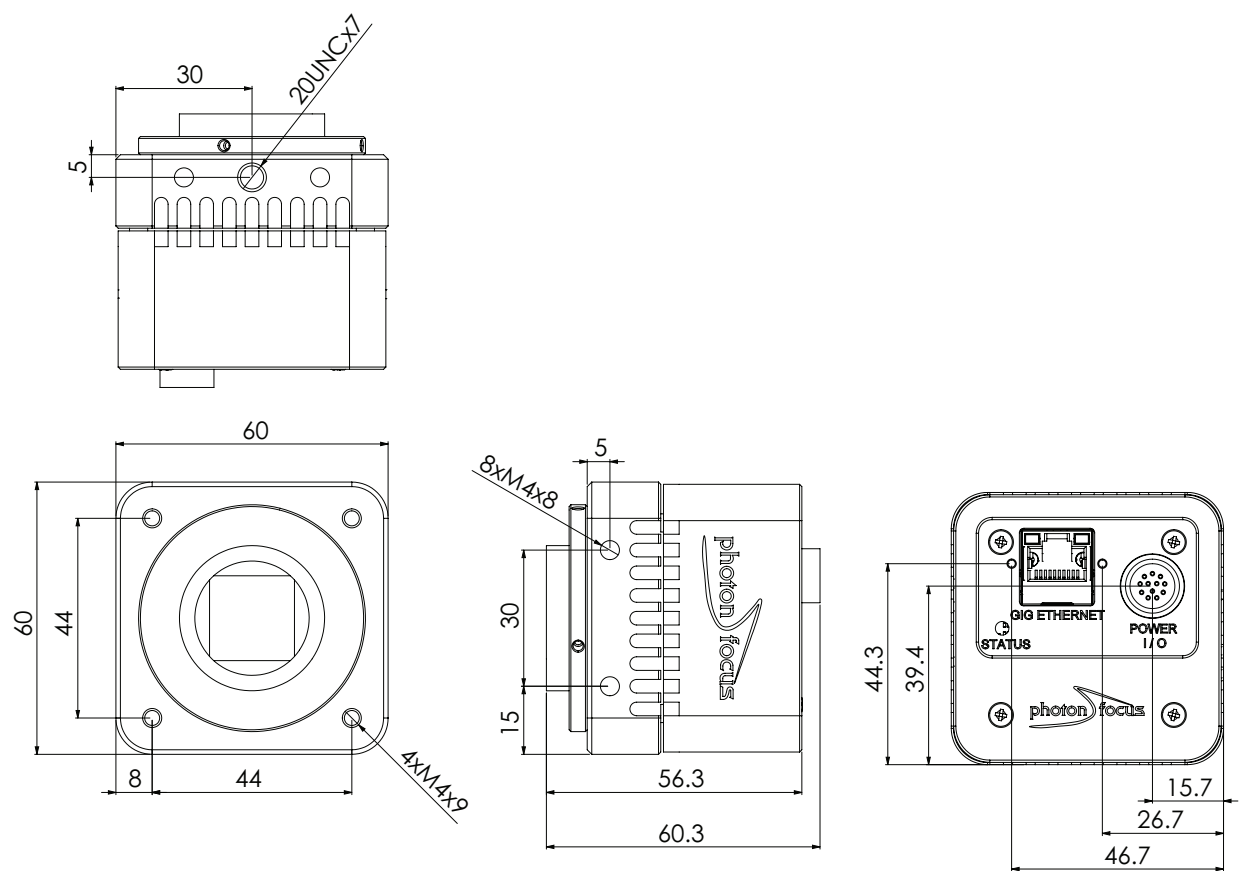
Mechanical dimensions of the MV1-D2080-G2 GigE camera with C-Mount adapter
